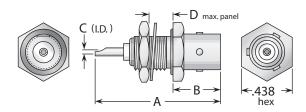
(Bulkhead jack, front mount, with mounting gasket)
